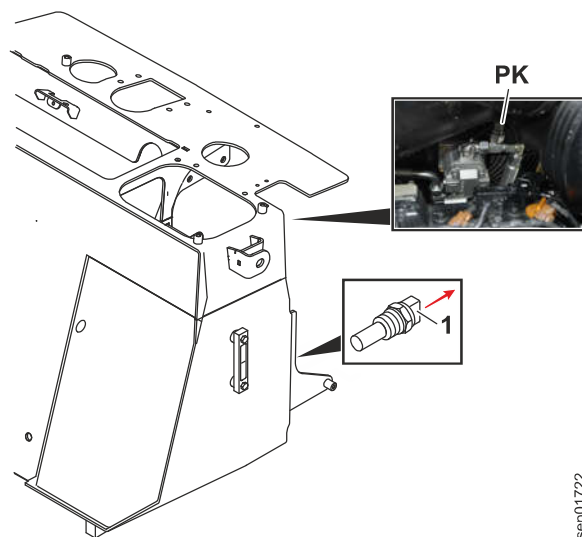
Fan gear motor: Pressure relief and proportional valve
